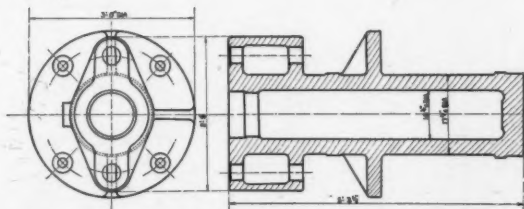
DRAWING OF LOW PRESSURE INTENSIFIER CYLINDER.
